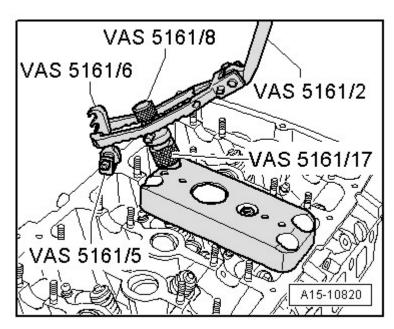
Insert Installation Cartridge With Knurled Spacer Wheel Into Guide Plate. Courtesy of AUDI OF AMERICA, LLC
